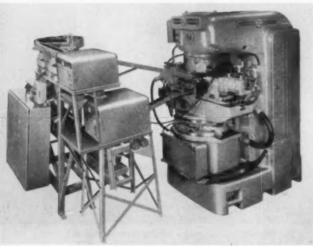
Automatic gear gages used as in and out gages with a rotary gear shaving machine.
